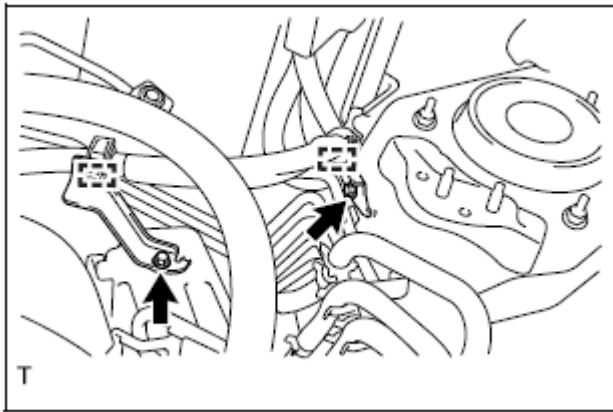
Identifying Wiring Harness Clamp Bracket Mounting Bolts And Clamps
